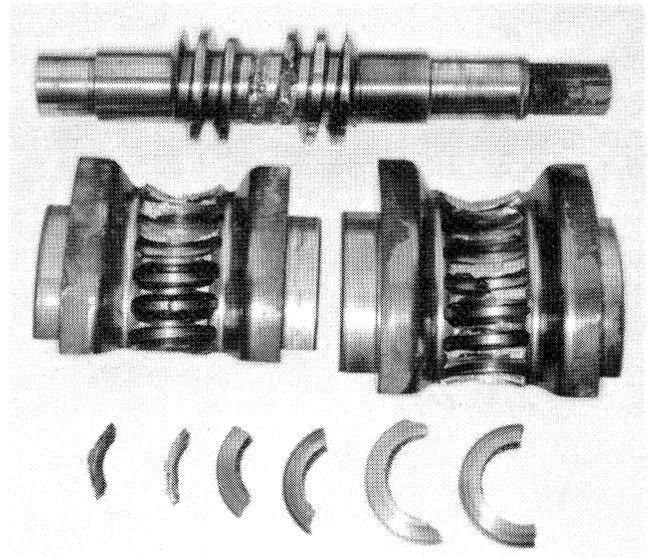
A Worm and Gear Failure of a Clamp Assembly Failure Due to Excessive Tightening/Overstress.
